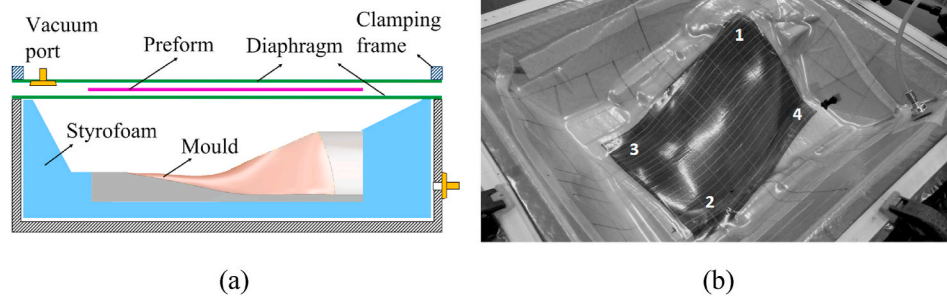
(a) Cross-sectional schematic of the forming rig with exploded view showing the position of diaphragms and preform; (b) overview of forming rig with formed prepreg and forming sequence. (the numbers indicate the order in which forming of each part is completed.)
